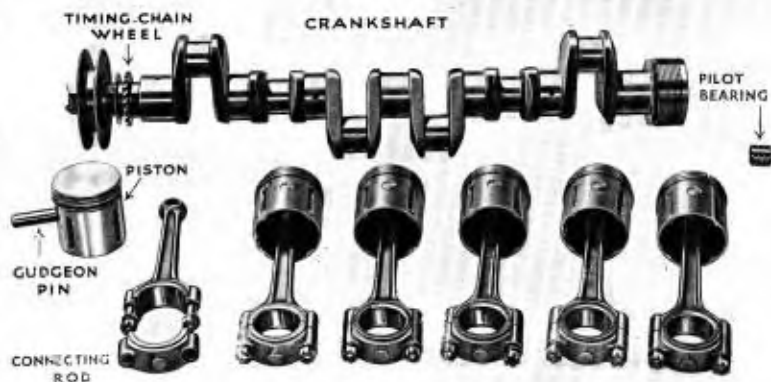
S.S. I. Engine Details: Crankshaft, Pistons, Connecting Rods, etc.
